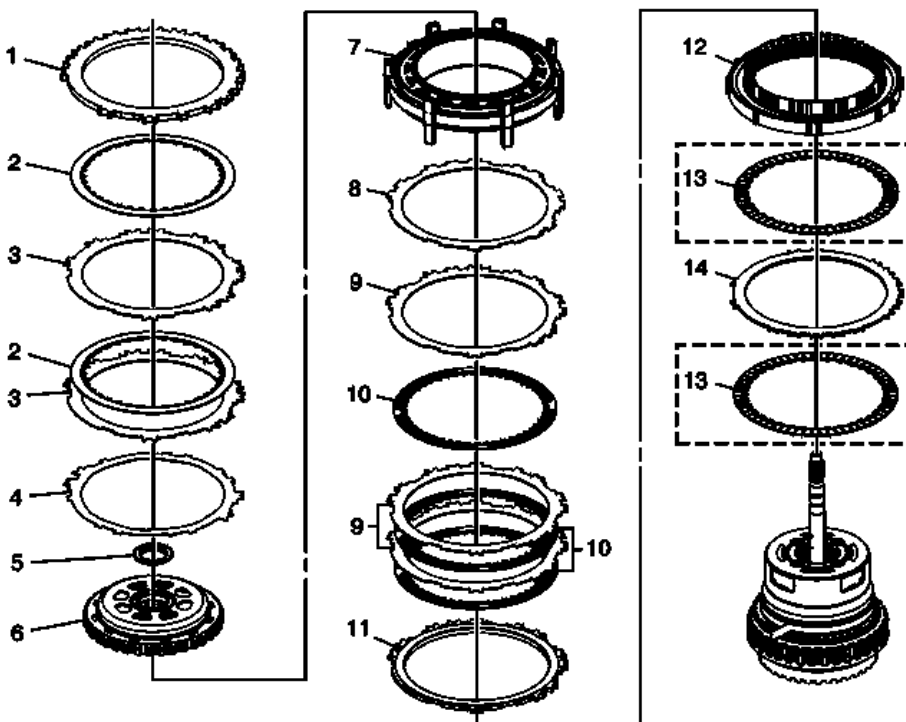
1-2-3-4 Clutch Housing And Clutch Assembly Components
